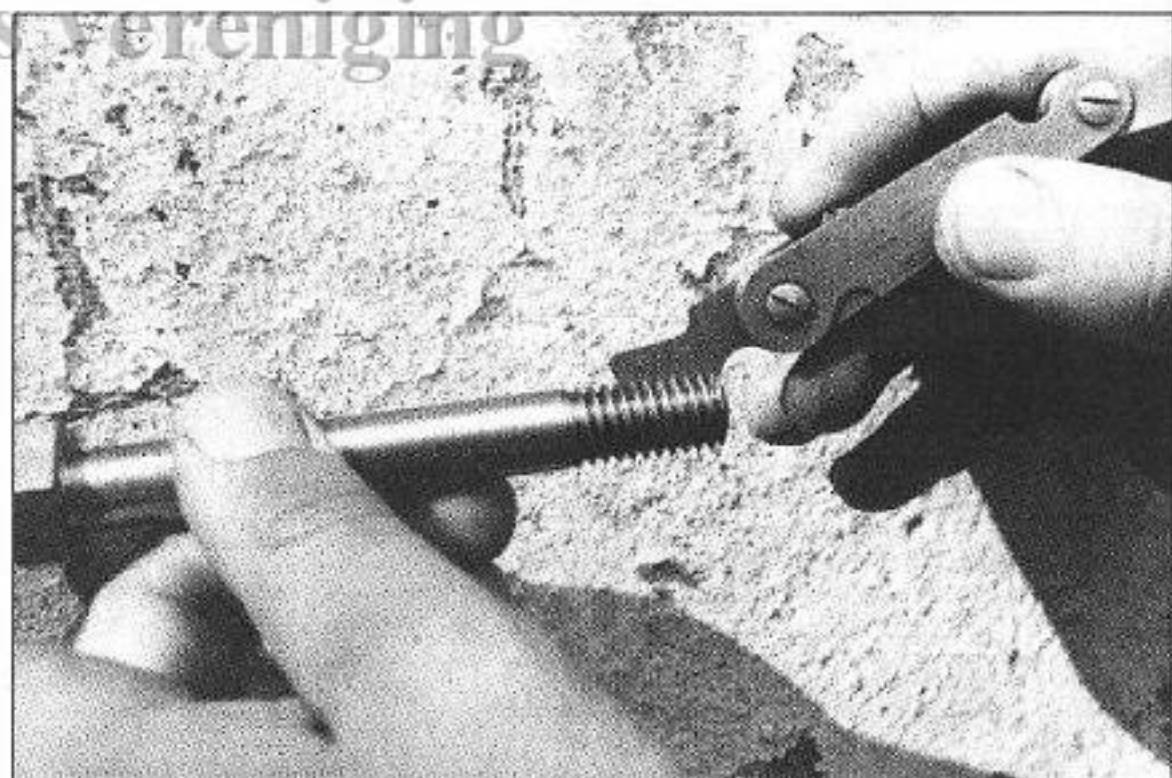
Measuring with thread gauge x 1/4" BSW with 12 TPI on bright (28 ton) steel bolt. Okay for fixing your angle iron workshop stand together.
